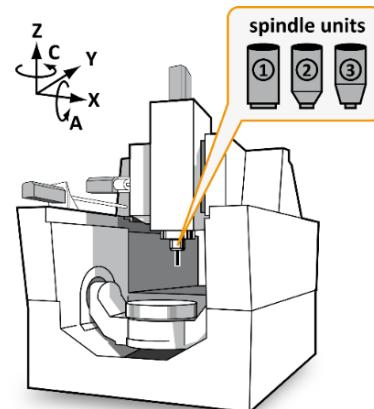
Multifunctional 5-axis CNC machining centre equipped with different motorized spindle units (SP1, SP2 and SP3)
